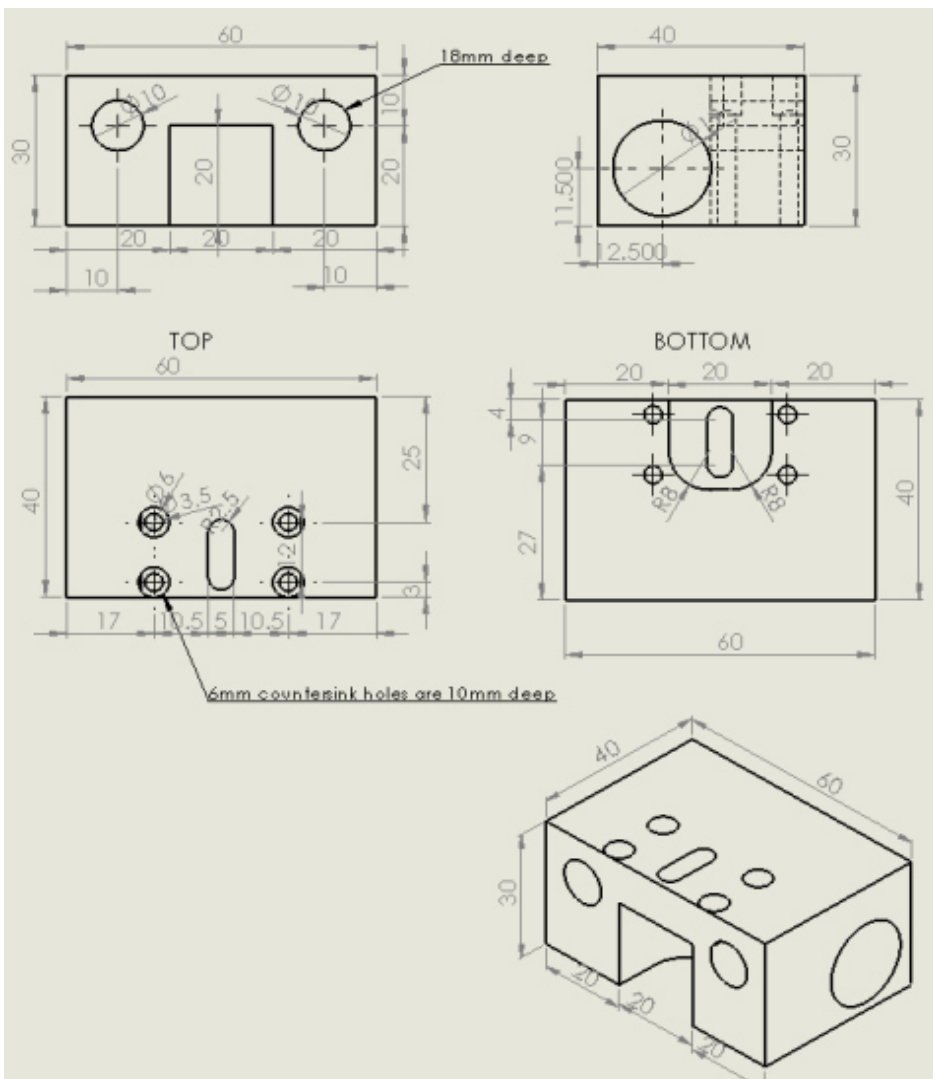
'Endplate Pulley v1'. This is the pulley mount for the moving motor.
